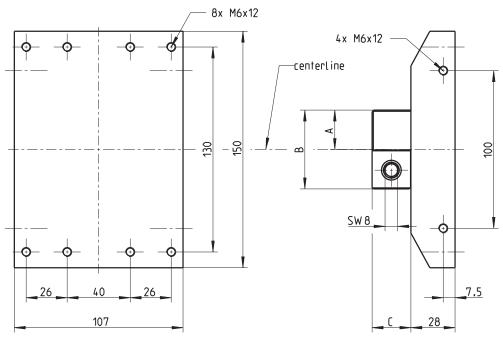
Machine adapter with clamping wedge for disk-type turrets with direct tool holding fixture, Type 9129AD...
